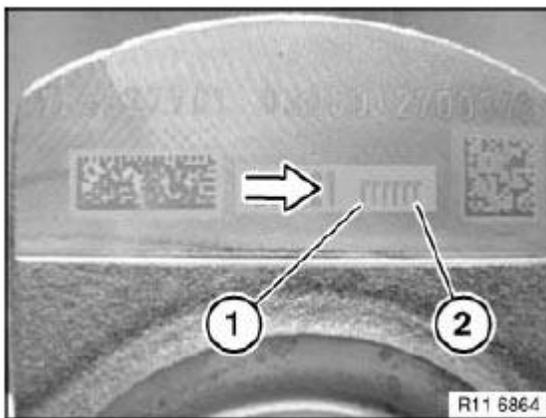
Direction Of Fitting Color In Connecting Rod And Connecting Rod Bearing Cap
